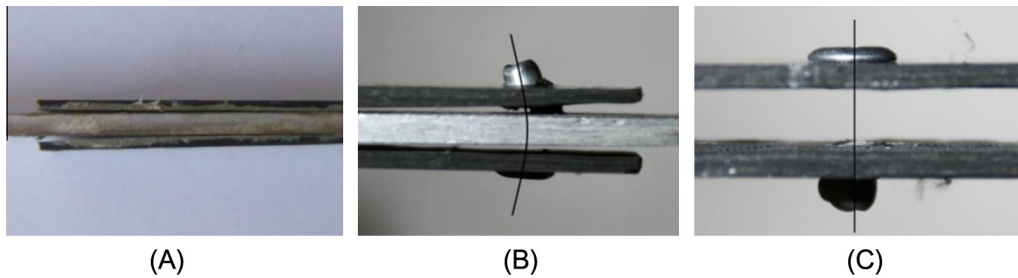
Failure mode of (A) simply adhesively bonded joints, simply riveted joints (B) with steel rivets and (C) aluminum rivets.
